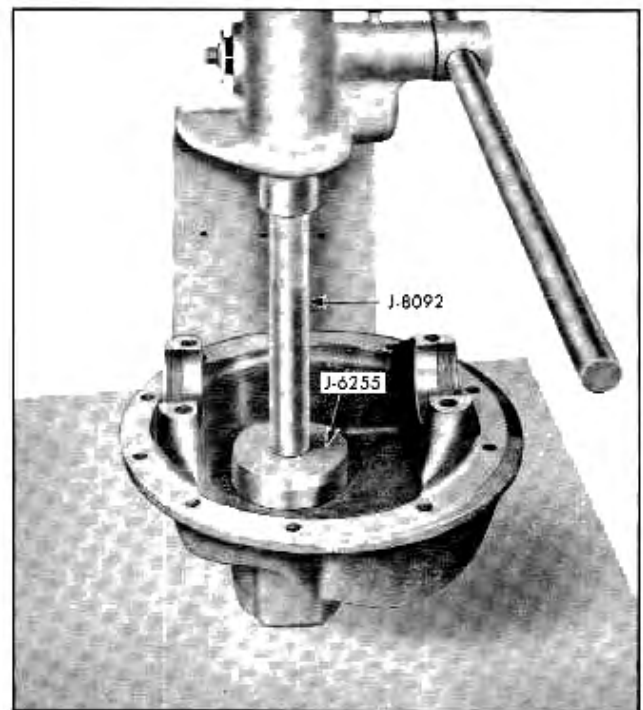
Installing Rear Bearing Outer Race With Installer J-6255 And Drive Handle J-8092
